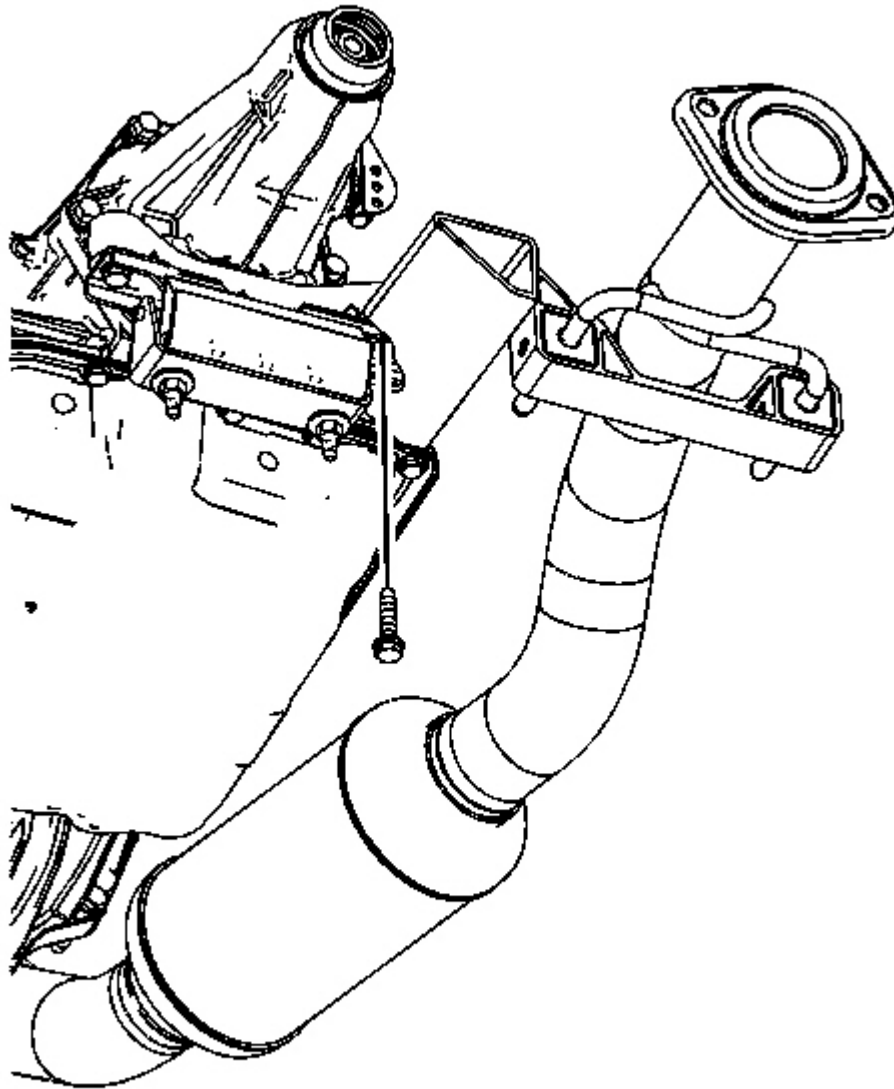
View Of Exhaust Hanger-To-Transmission Mount Bolt
